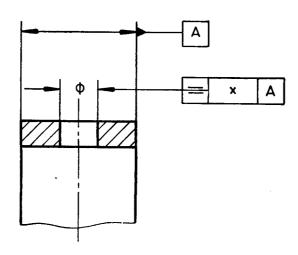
SYMMETRY TOLERANCE ON OIL HOLES
